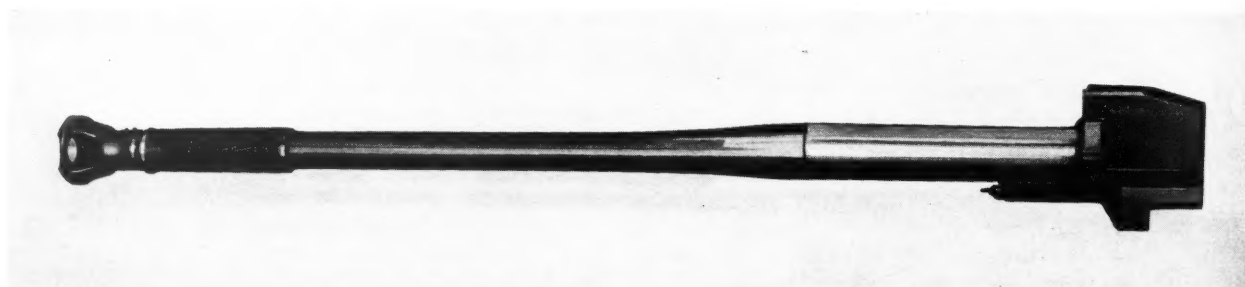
(Above) Finished 90-millimeter gun barrel complete with breech-ring, muzzle brake, and bore evacuators
